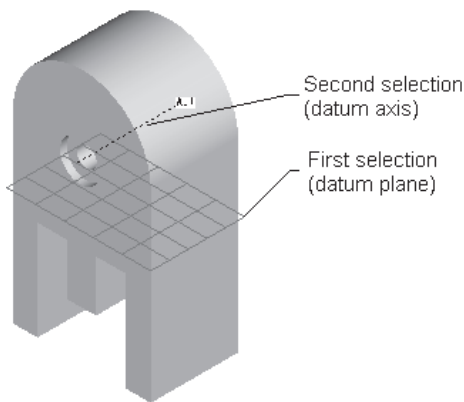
Selecting a datum plane and an axis to create a datum plane
